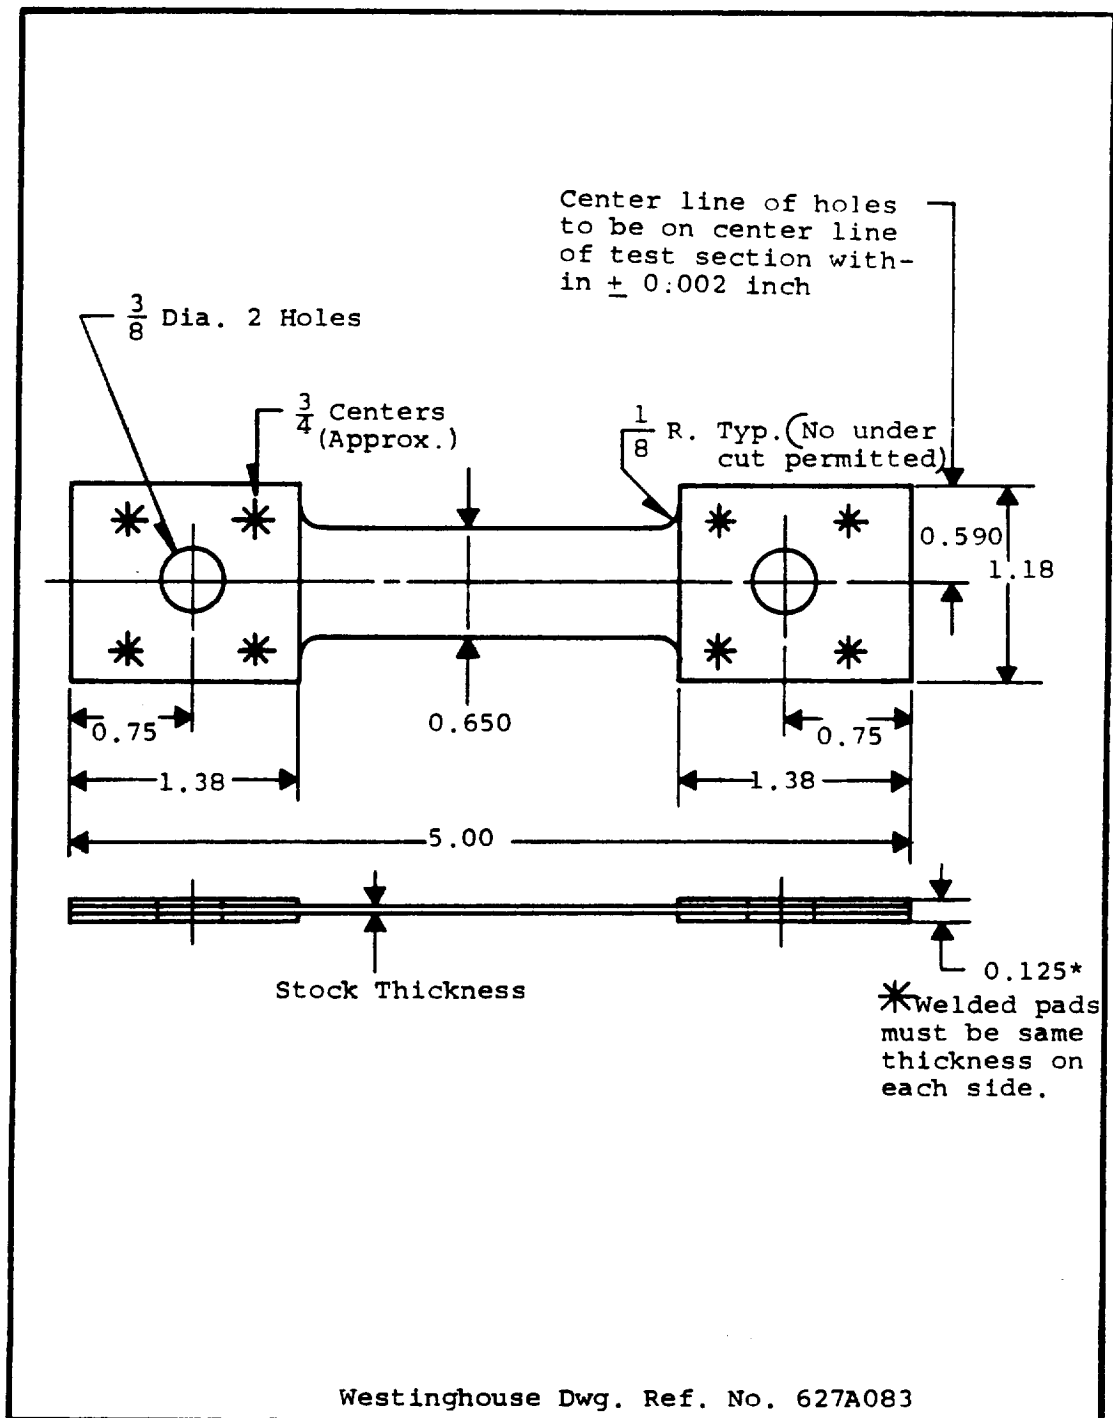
Tensile-Creep Specimen, Sheet Materials for Transverse Specimens Taken from Narrow Sheet
